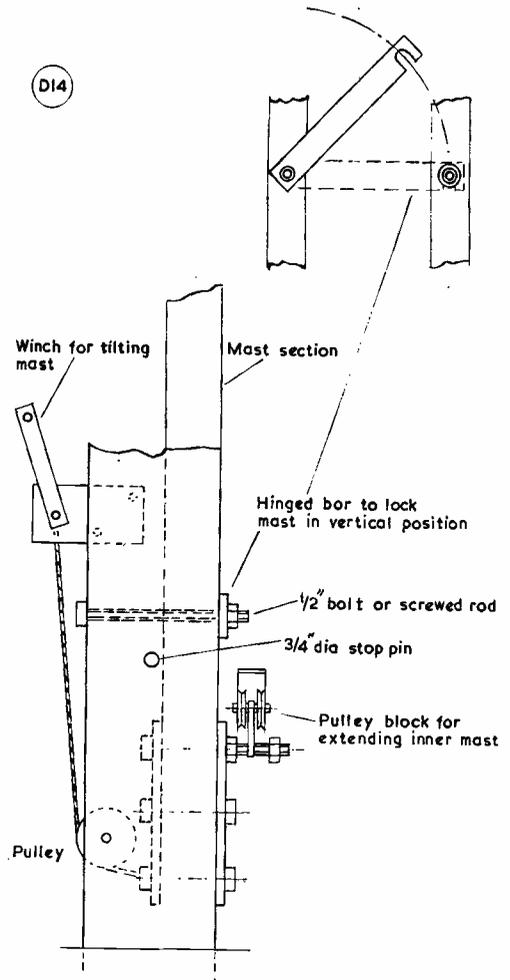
END VIEW OF LOWER HALF OF TABERNACLE
